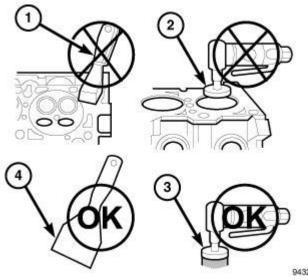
Proper Tool Usage For Surface Preparation Courtesy of CHRYSLER GROUP, LLC
